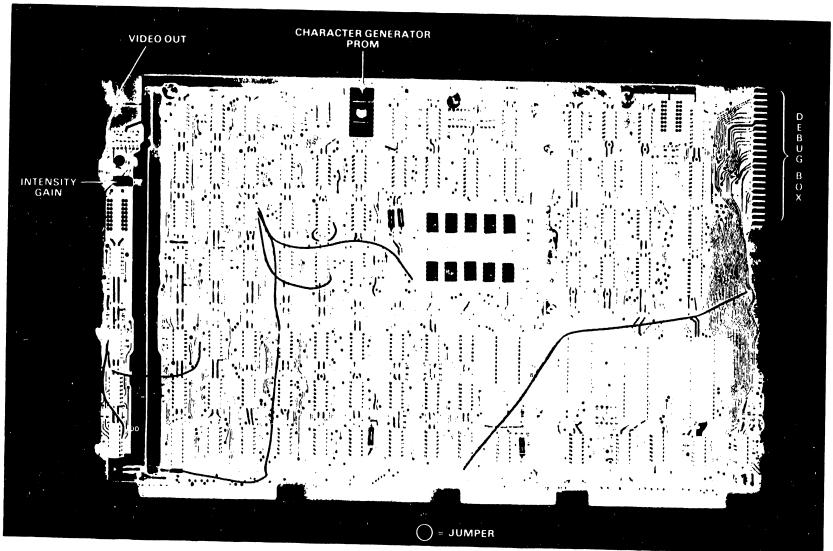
MASTER (5505-1) — CPU/CRT PCB
